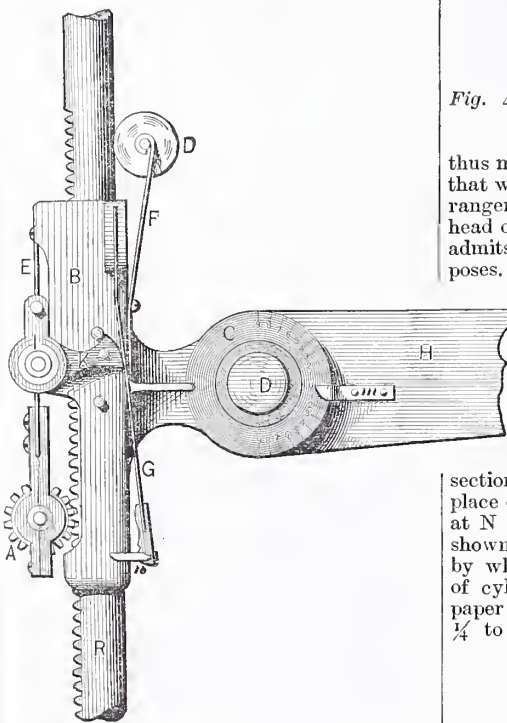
Working Parts of the Positive T-Square and Section Liner.
